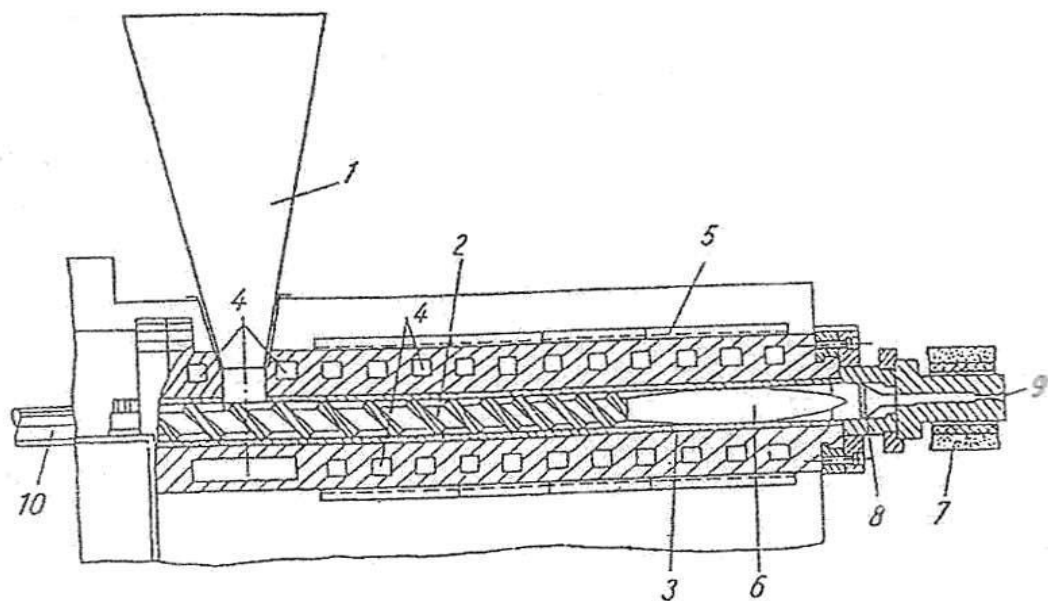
Worm Extruder - 1 - hopper, 2 - auger, 3 - worm sleeve (cylinder), 4 - cooling, 5 - heating, 6 - torpedo, 7 - nozzle, 8 - axis
